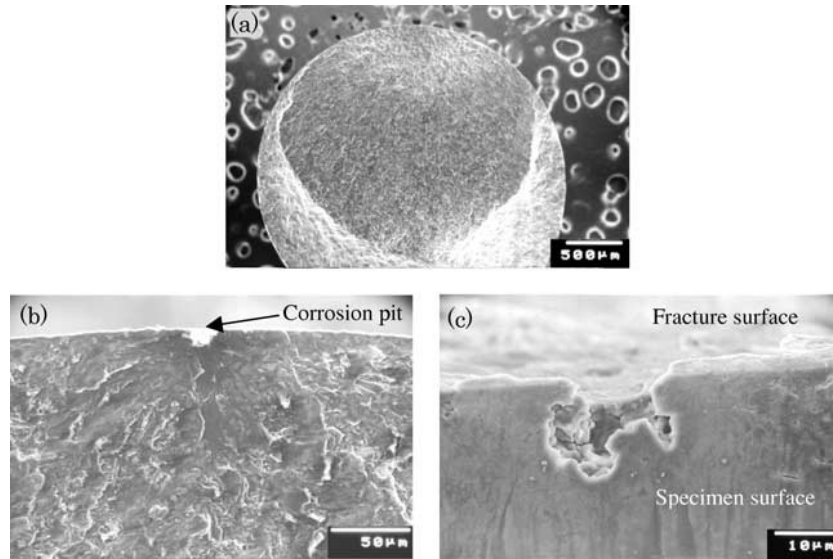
SEM fractographs showing (a) overview of the fracture surface (b) formation of corrosion pit, fatigue-crack initiation and propagation and (c) specimen surface corrosion pit in specimen tested at 130 MPa at 50°C with 80% relative humidity (Sajuri et al. 2005).
